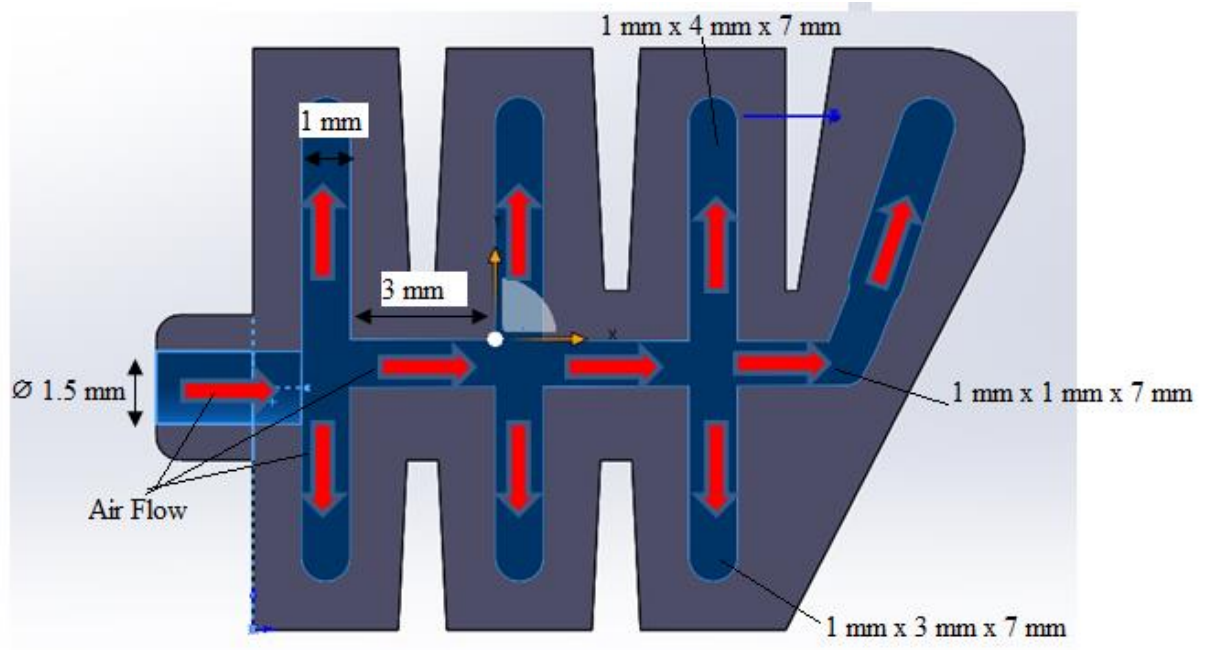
The cross-section view of DIP joint rotary actuator in the HE. The internal and external dimensions of DIP and PIP actuators are same.
